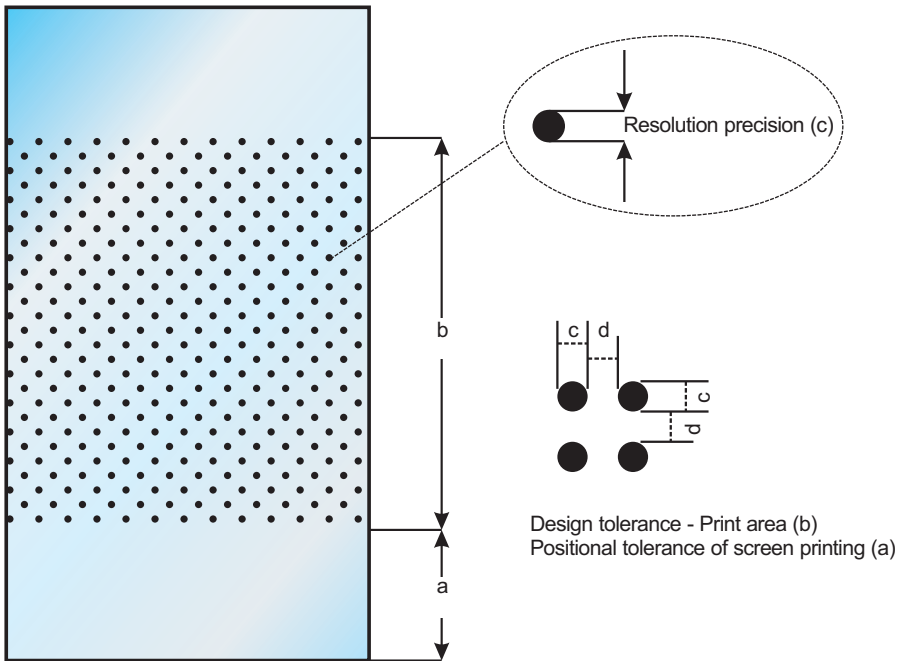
to Tab. 21: Types of defects / tolerances for screen-printed glass
